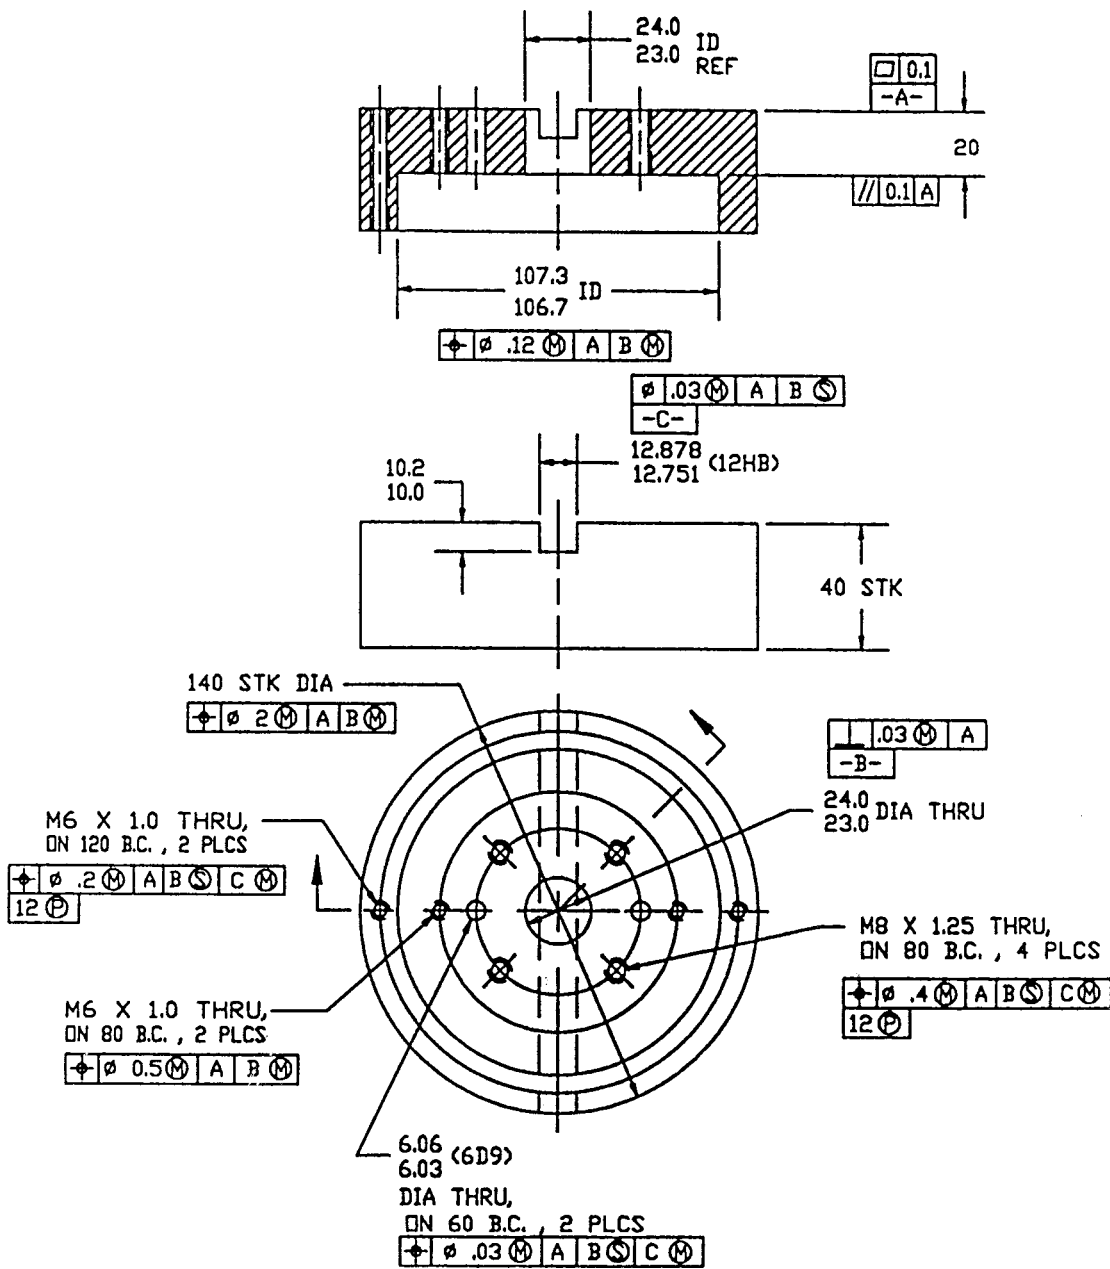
Outer Shell of the Shear Fixture in SI Units
